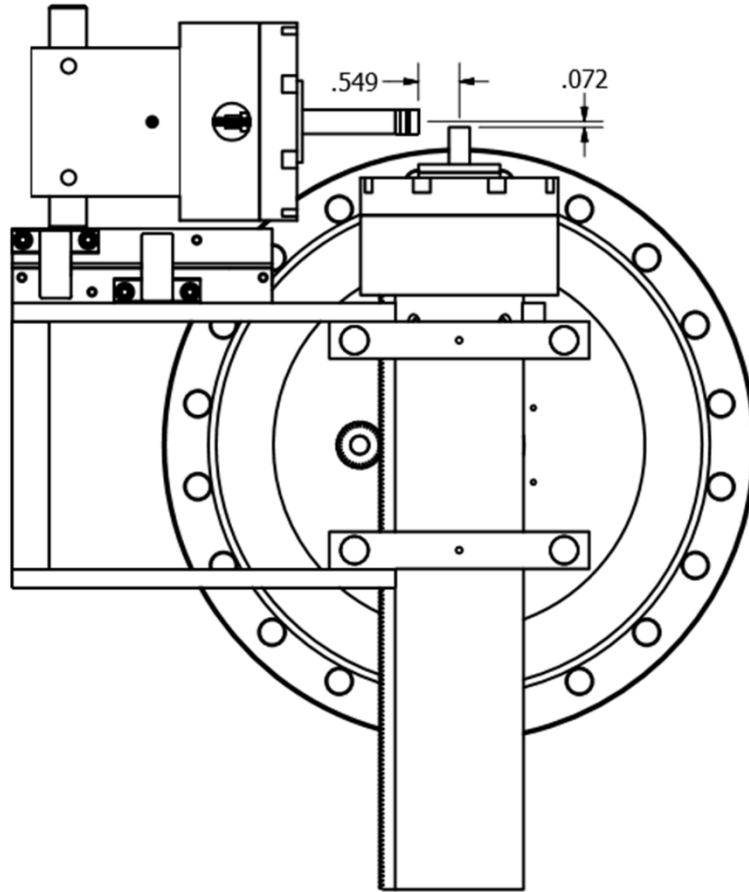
Dual pulsed valve assembly. Relevant dimensions are reported in inches.
